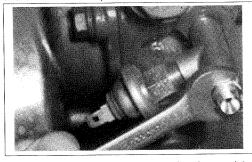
Screw the oil pipeline connector into the remaining T-piece connection.
